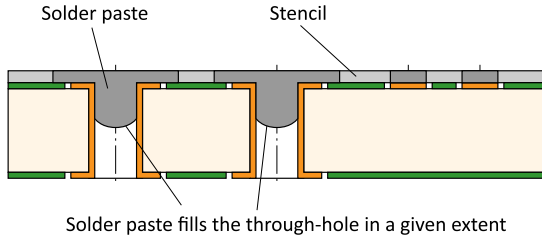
Pin-in-paste technology—stencil printing.
